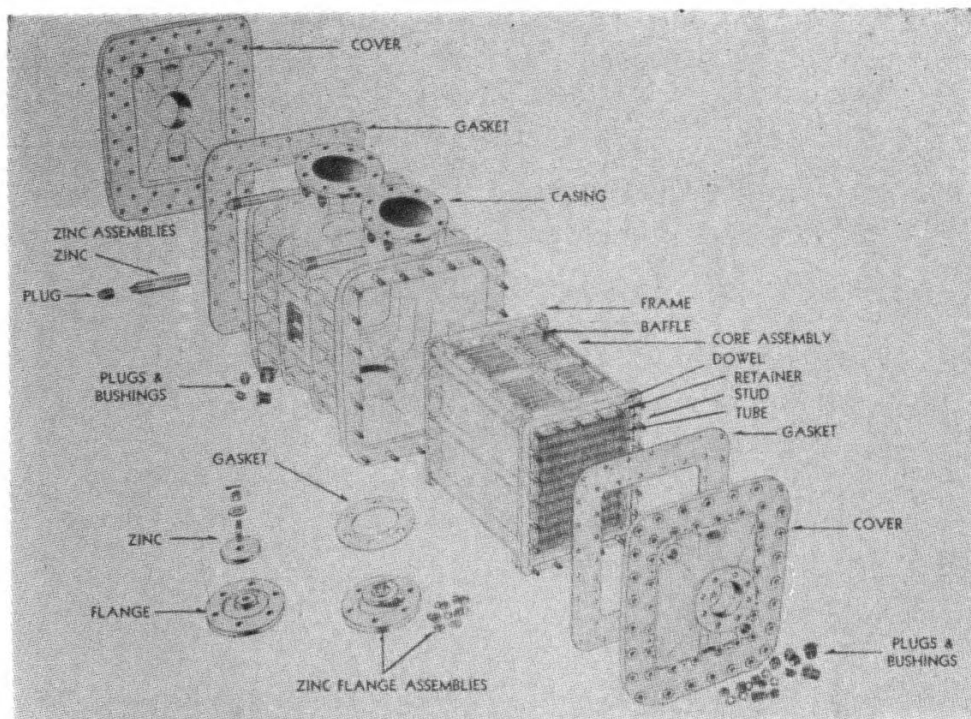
Parts of a strut-tube cooler (Harrison).
